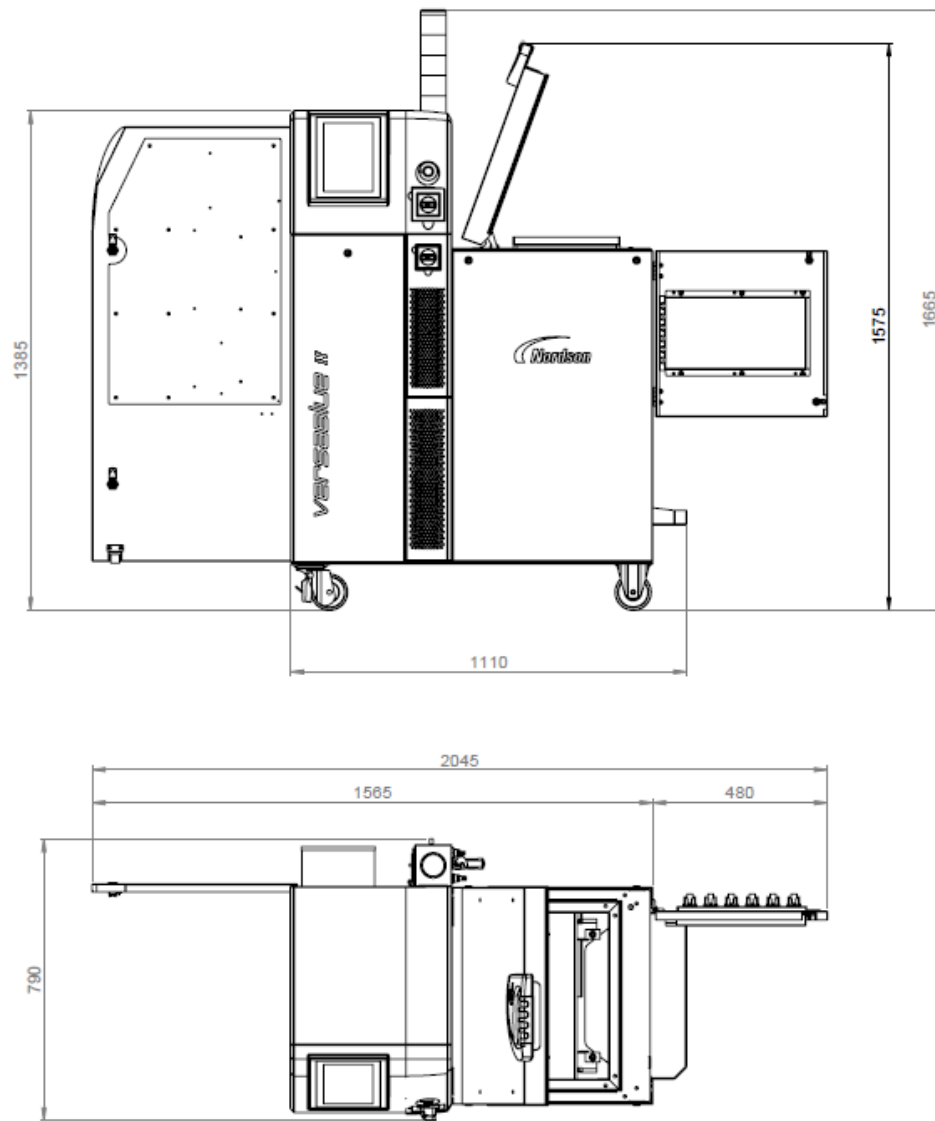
Melter types B and C: Outer dimensions, front view and top view
